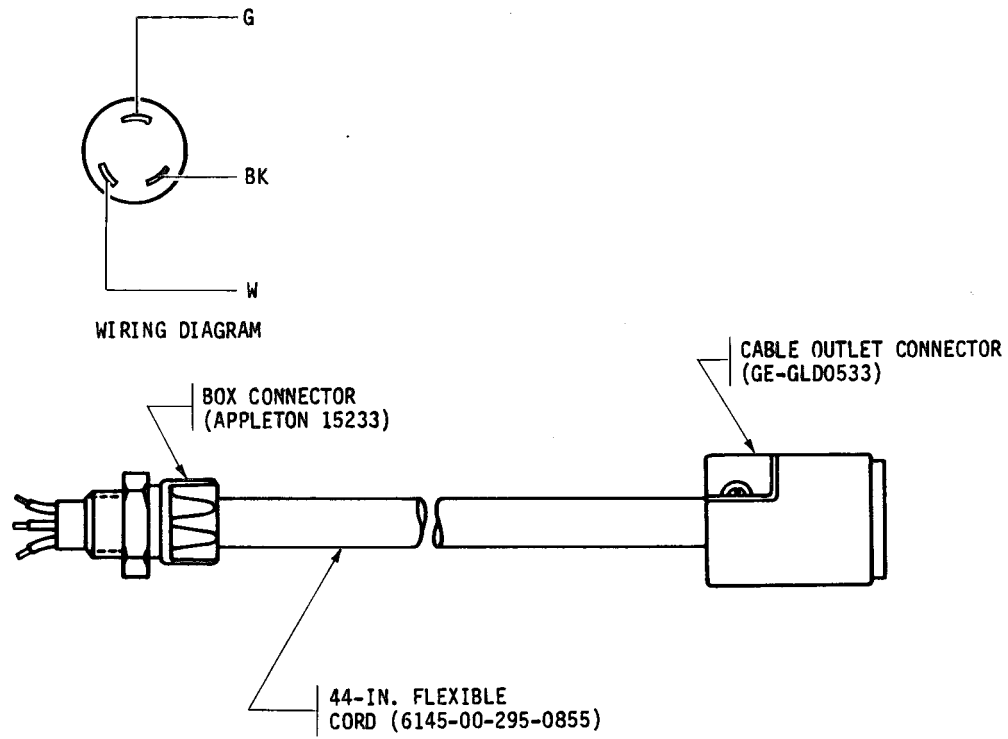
Power cable assembly, 11021163, unit 2, M35A2.
